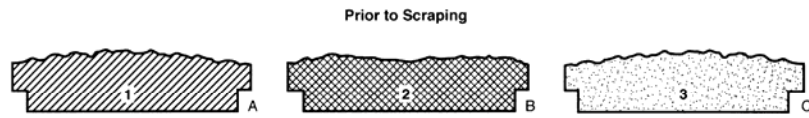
Greatly exaggerated, this shows the possible surface conformation of three plates after finish machining.
